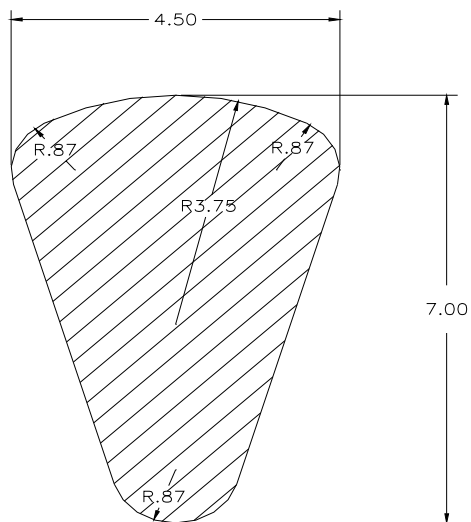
Trapezoidal Section of Crane Hook.
